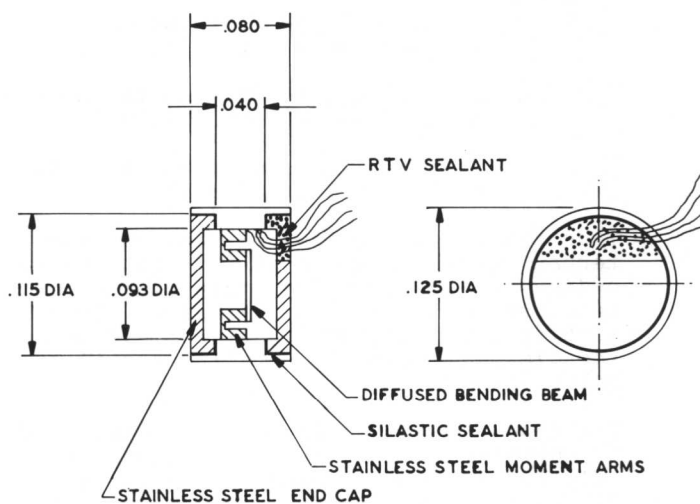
ASSEMBLY DRAWING FOR BONE IMPLANTABLE TRANSDUCER
